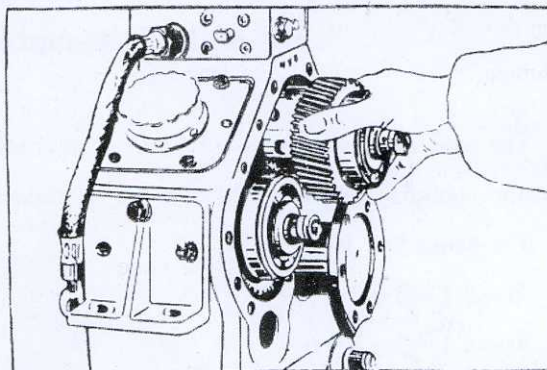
Dis-and Re-assembling of Clutch Assembly
